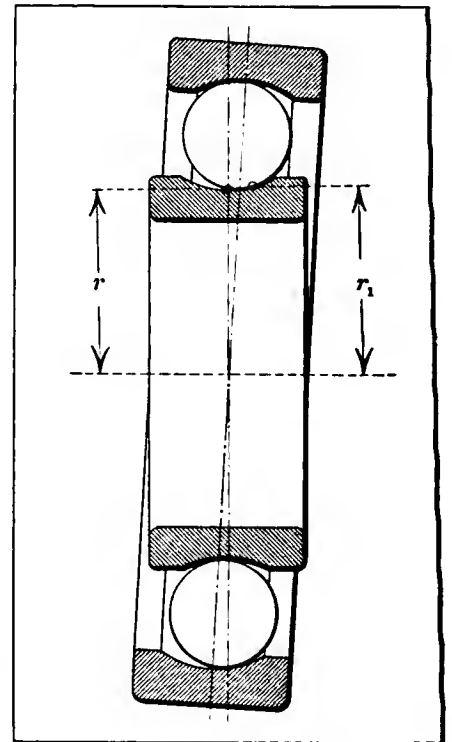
Showing position which is assumed by a ball bearing if the outer raceway is pushed over to one side.
